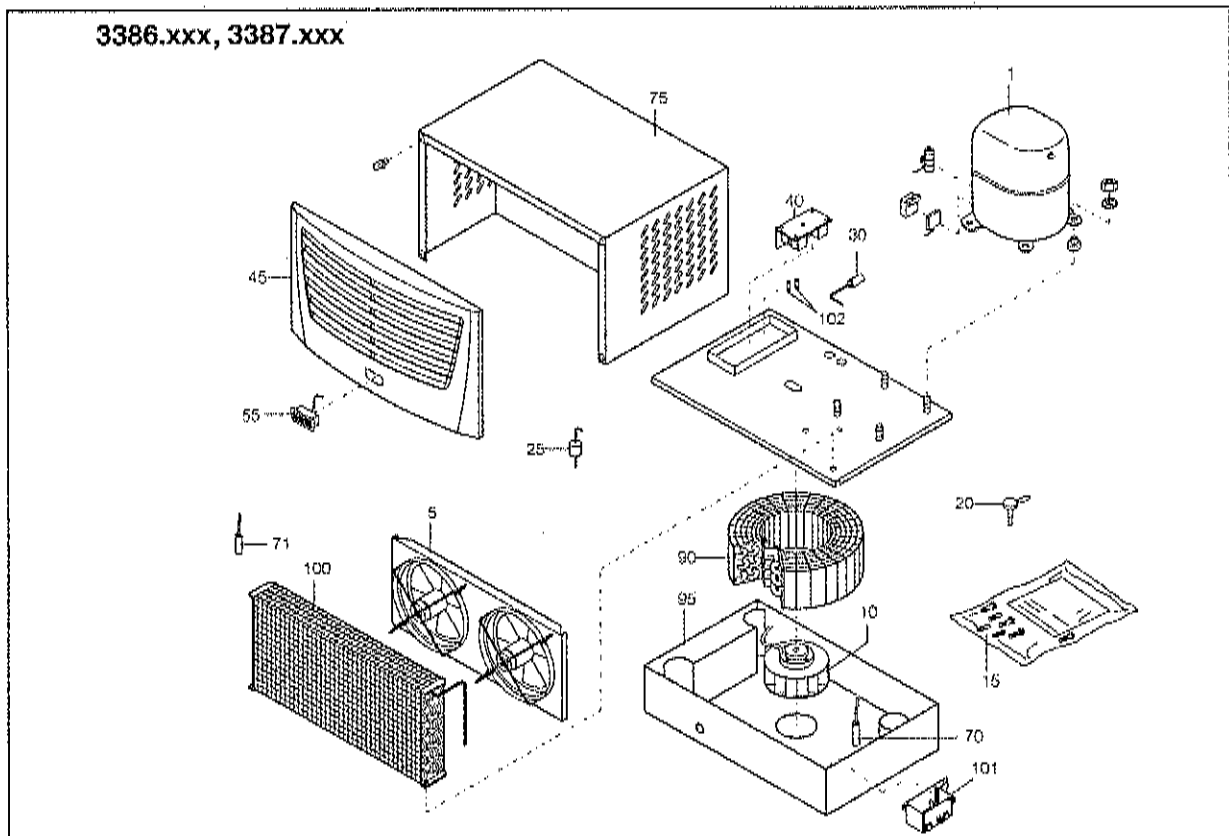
Spare parts for 3386.xxx, 3387.xxx
